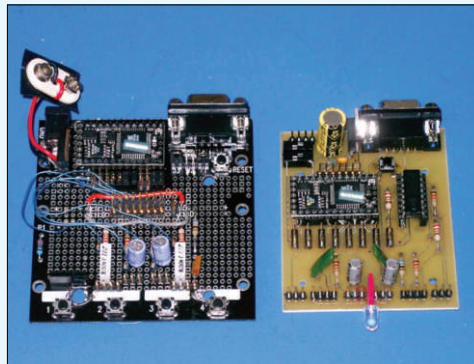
Finished PCB on the right and the hand wired circuit on the left.
